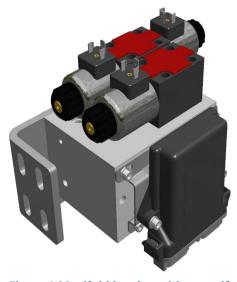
Manifold bracket with a manifold and steering controller mounted.
